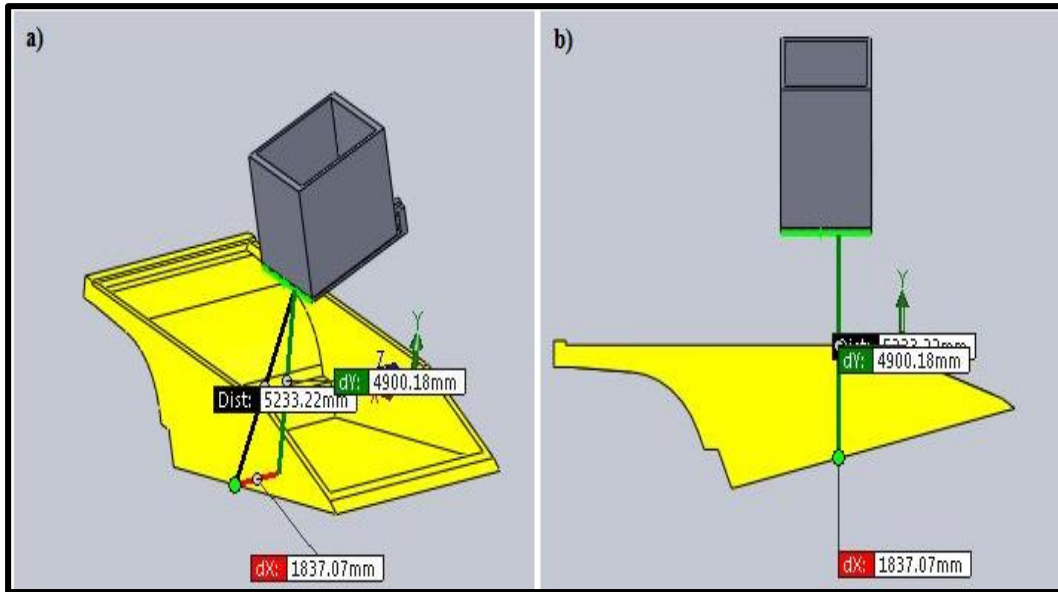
Truck Body and Shovel Dipper CAD Assembly for $H_t = 4.90$ m (4900 mm):
